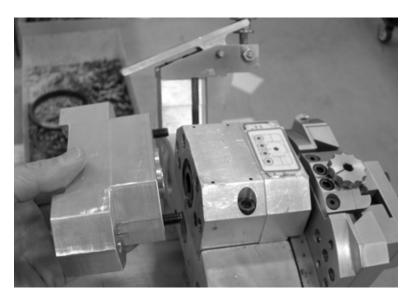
Attach the hydraulic drive adapter to the pinion housing.
